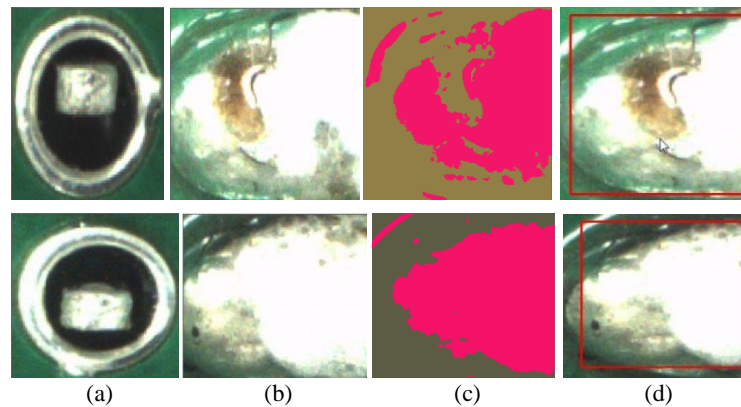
Identification of Solder bridging among different solder pads. (a) Solder pad with component lead. (b) Solder bridge. (c) Result from k-means algorithm. (d) Detected solder bridge shown by red box
